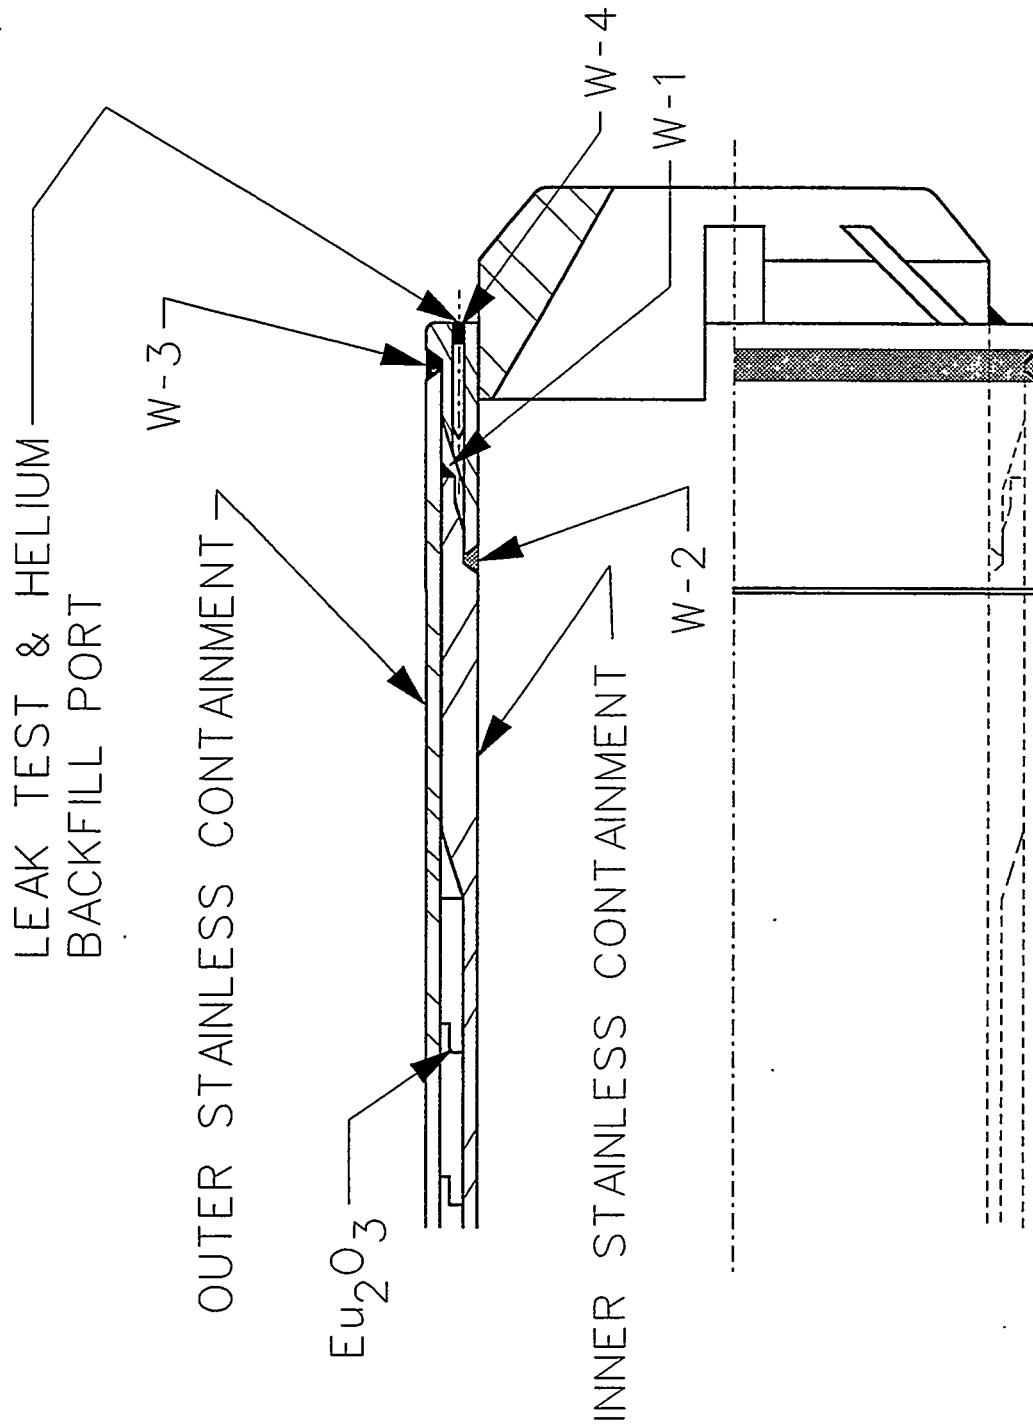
Bottom section of the shield can showing the details of the seal welds. Weld W-1 and one of W-2, W-3, or W-4 must fail in order to produce a leak. W-4 is the seal for the helium back-fill port to provide a means of leak checking the welds.
